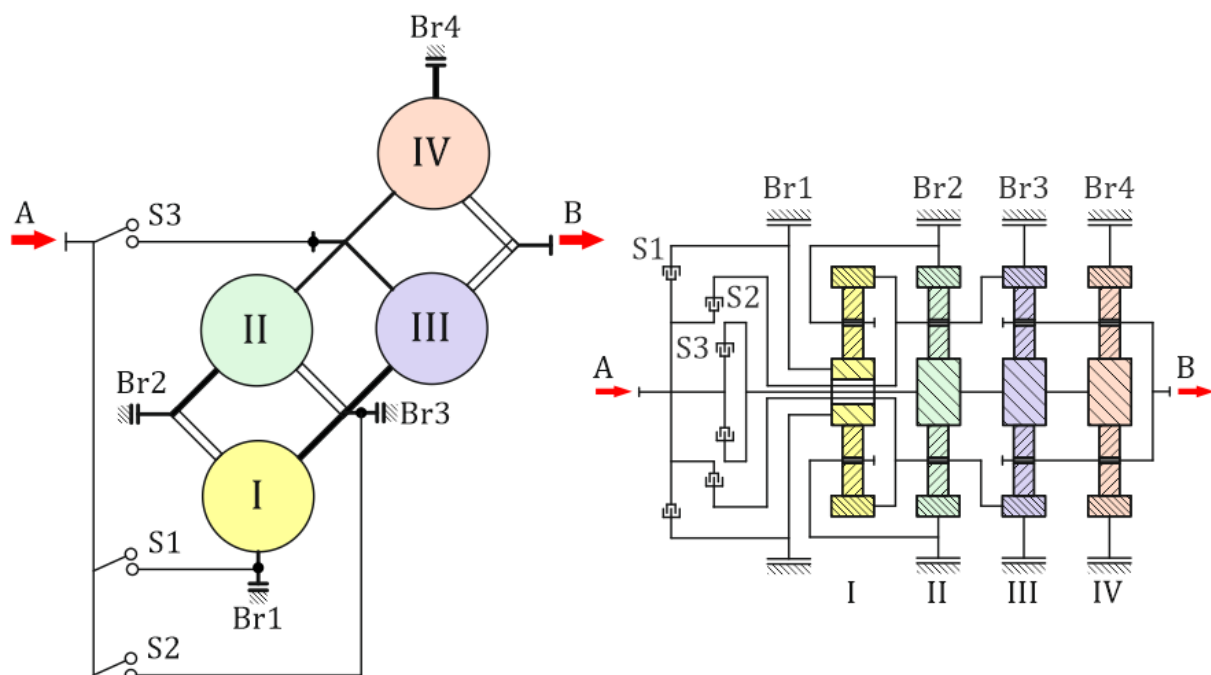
Structural (left) and kinematic scheme (right) of the four-carrier, six-speed ZF 6HP500 gearbox
